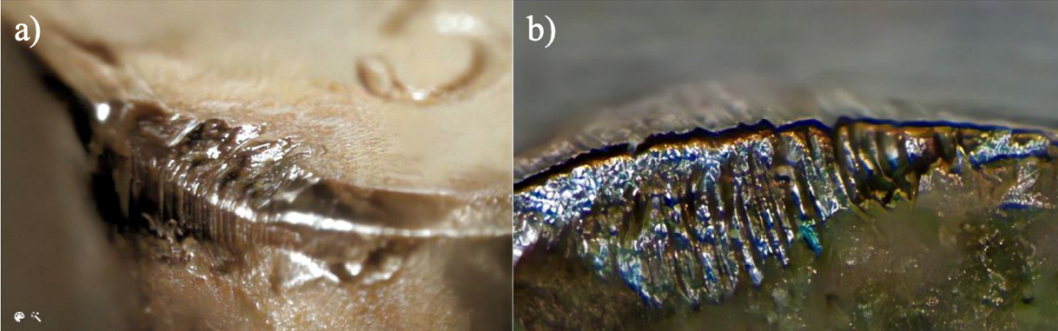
Representative image of tool wear from OP30. a) overview, b) crater wear on rake face.
